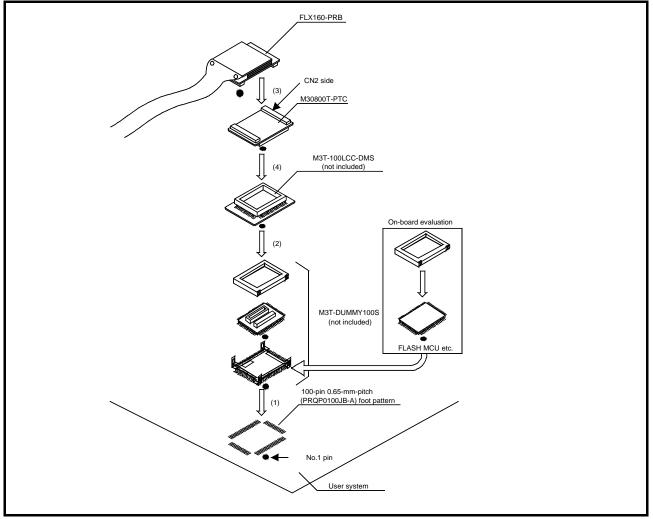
Connecting to a 100-pin 0.65-mm-pitch foot pattern (2/3)
